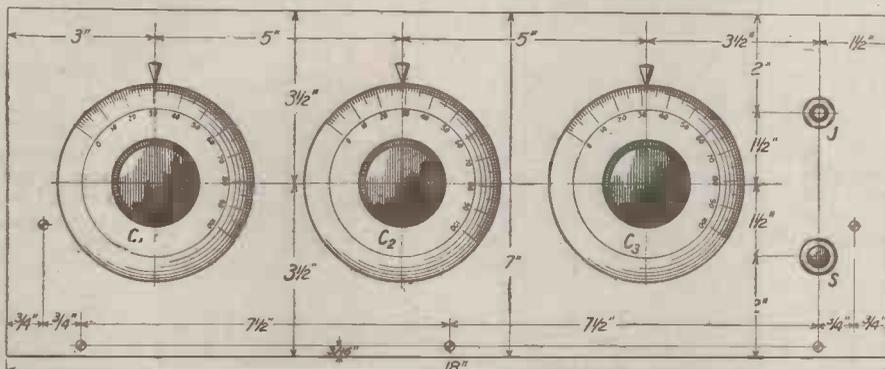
Your panel should be drilled in accordance with the dimensions given in this front-of-panel layout.
